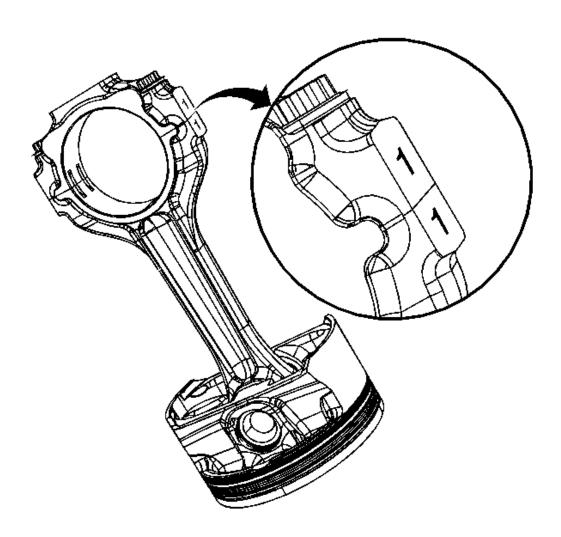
Matchmarks On Connecting Rods & Caps Courtesy of GENERAL MOTORS CORP.
